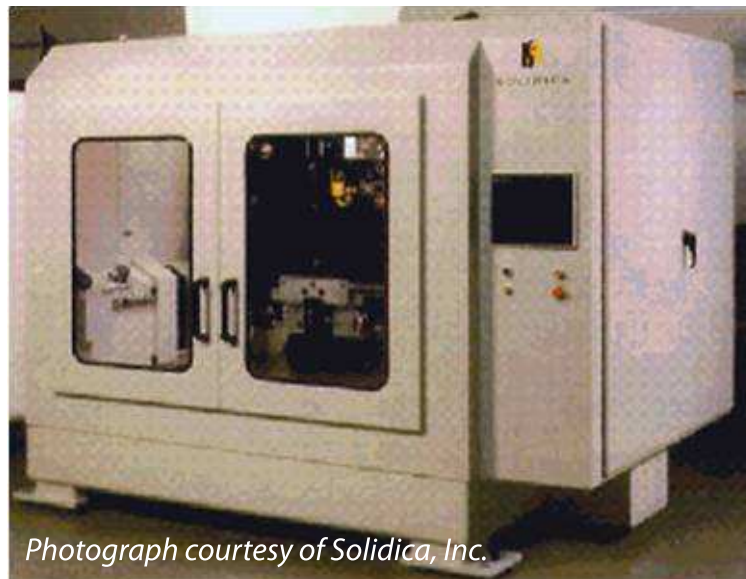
Photograph of Solidica, Inc.'s UAM Formation machine.
